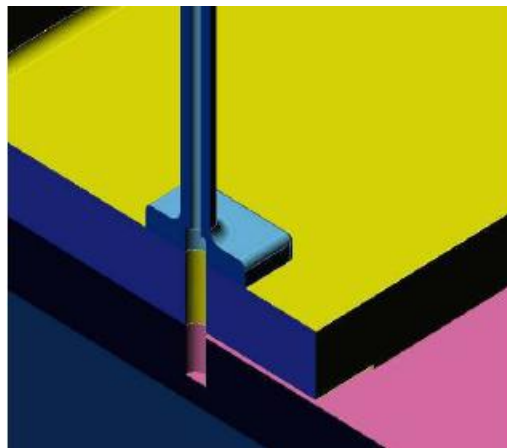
A schematic of a blind hole through the bond line forming part of a TTT sensor.
